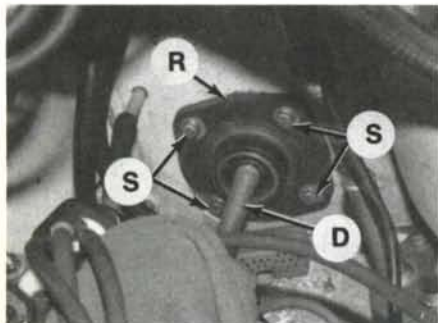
After withdrawing drive shaft (D) as outlined in text, remove cap screws (S) to withdraw bearing carrier assembly (R).
